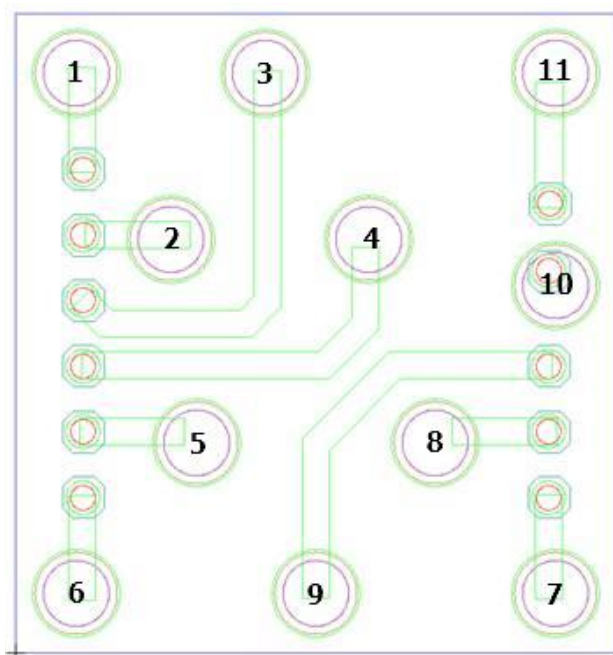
MS1089 CSP pad layout, the bumps facing up ("dead bug" view)
